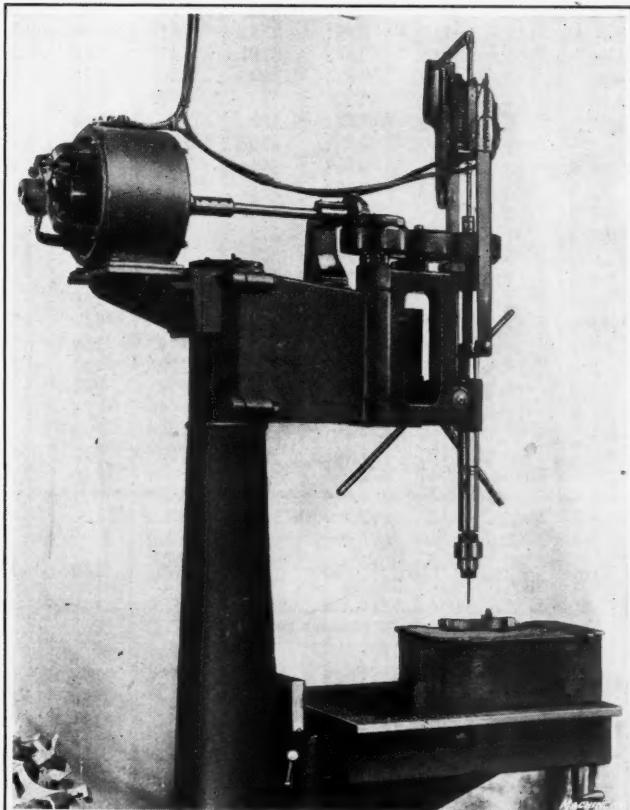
Radial Drilling Machine equipped with "Magic" Quick-change Chuck and Automatic Control for Variable-speed Motor Drive to assure Proper Cutting Speed for All Tools
